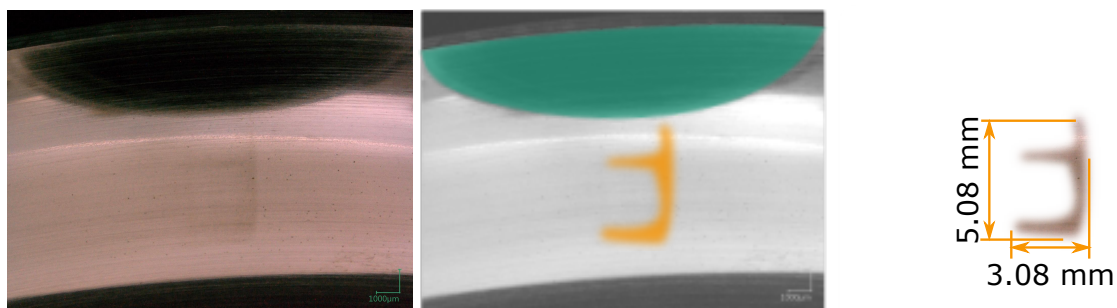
Exemplary raceway condition inner ring, Test ID 5, Bearing ID 0009
